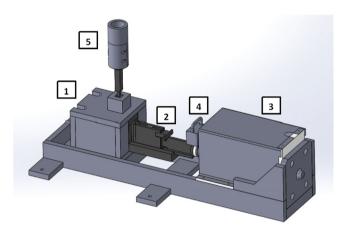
Model of the device for tests of metals and alloys welding: (1) heating chamber, (2) shearing and welding cartridge tool, (3) hydraulic cylinder, (4) adapter of hydraulic cylinder and tool assembly holder, (5) upper compressing punch.
